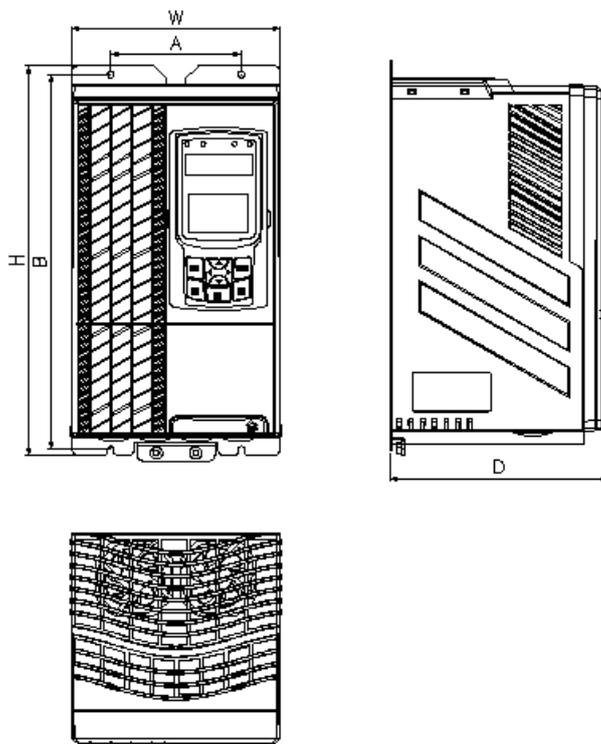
Installation dimensions of AS450 4T01P1~4T05P5
